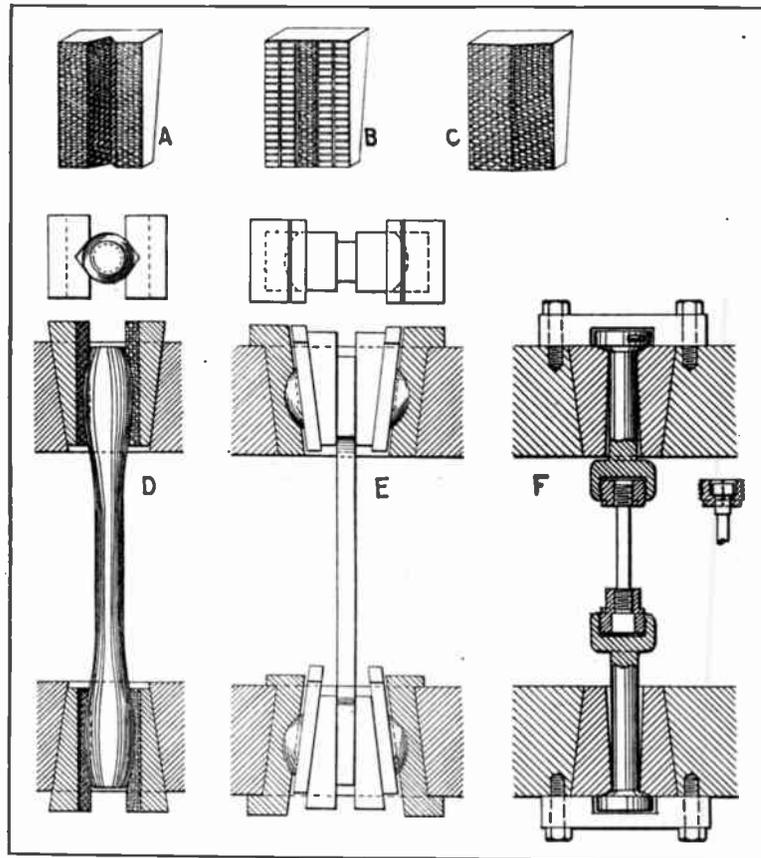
Diagrams showing how specimens to be tested are held in the testing machine
